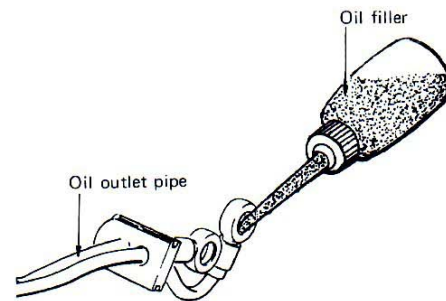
Injecting engine oil to oil outlet pipe
